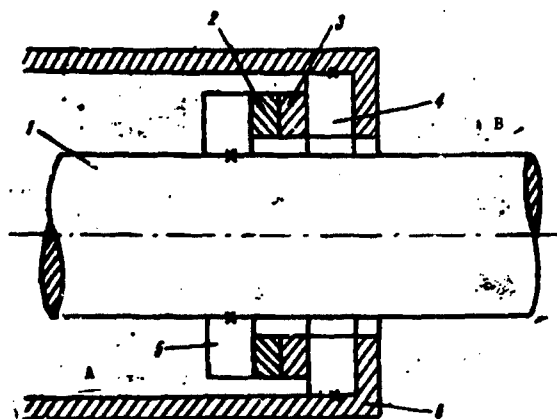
Constructional diagram of a face packing. A) sealed working cavity; B) surrounding area; 1 - rotating shaft; 2 - mobile ring; 3 - fixed ring; 4 - elastic coupling elements; 5 - fixed body; [Translator's note: Item #6 is not given in the key to the figure].
